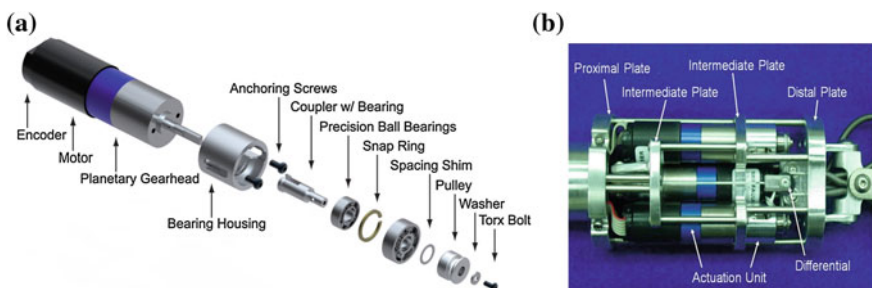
Exploded view of the actuation unit (a) and anterior view of the actuation unit housing (b)
